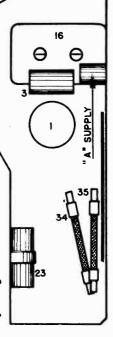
PARTS LAYOUT -- Vibrator Filter
